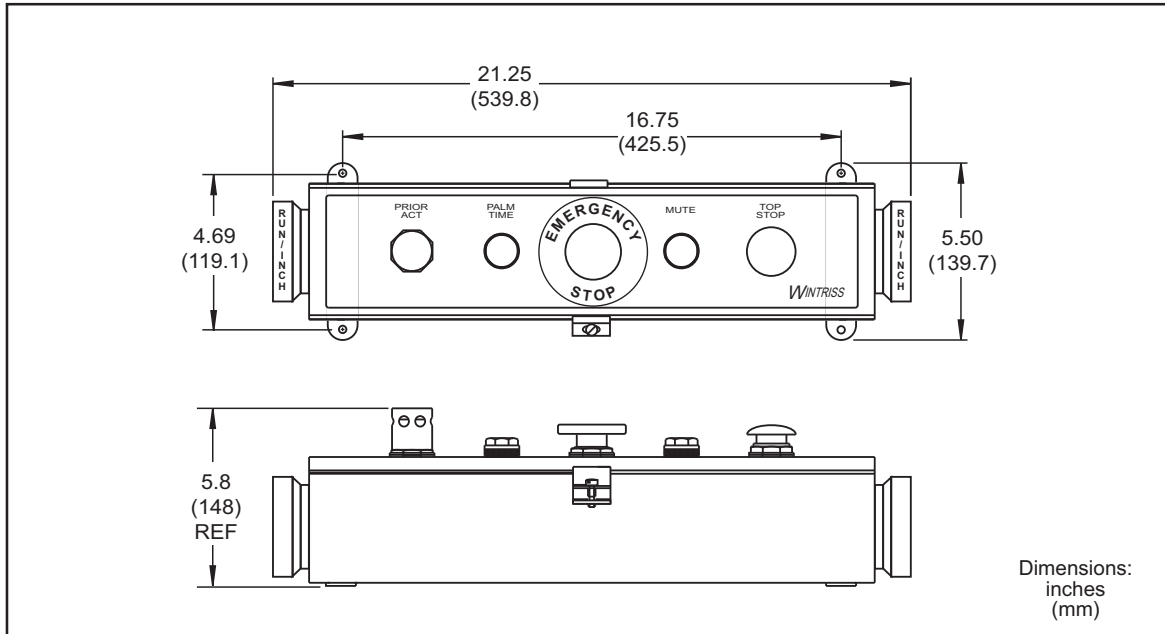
Pre-wired Operator Station with Side Run Buttons: Mounting Dimensions
